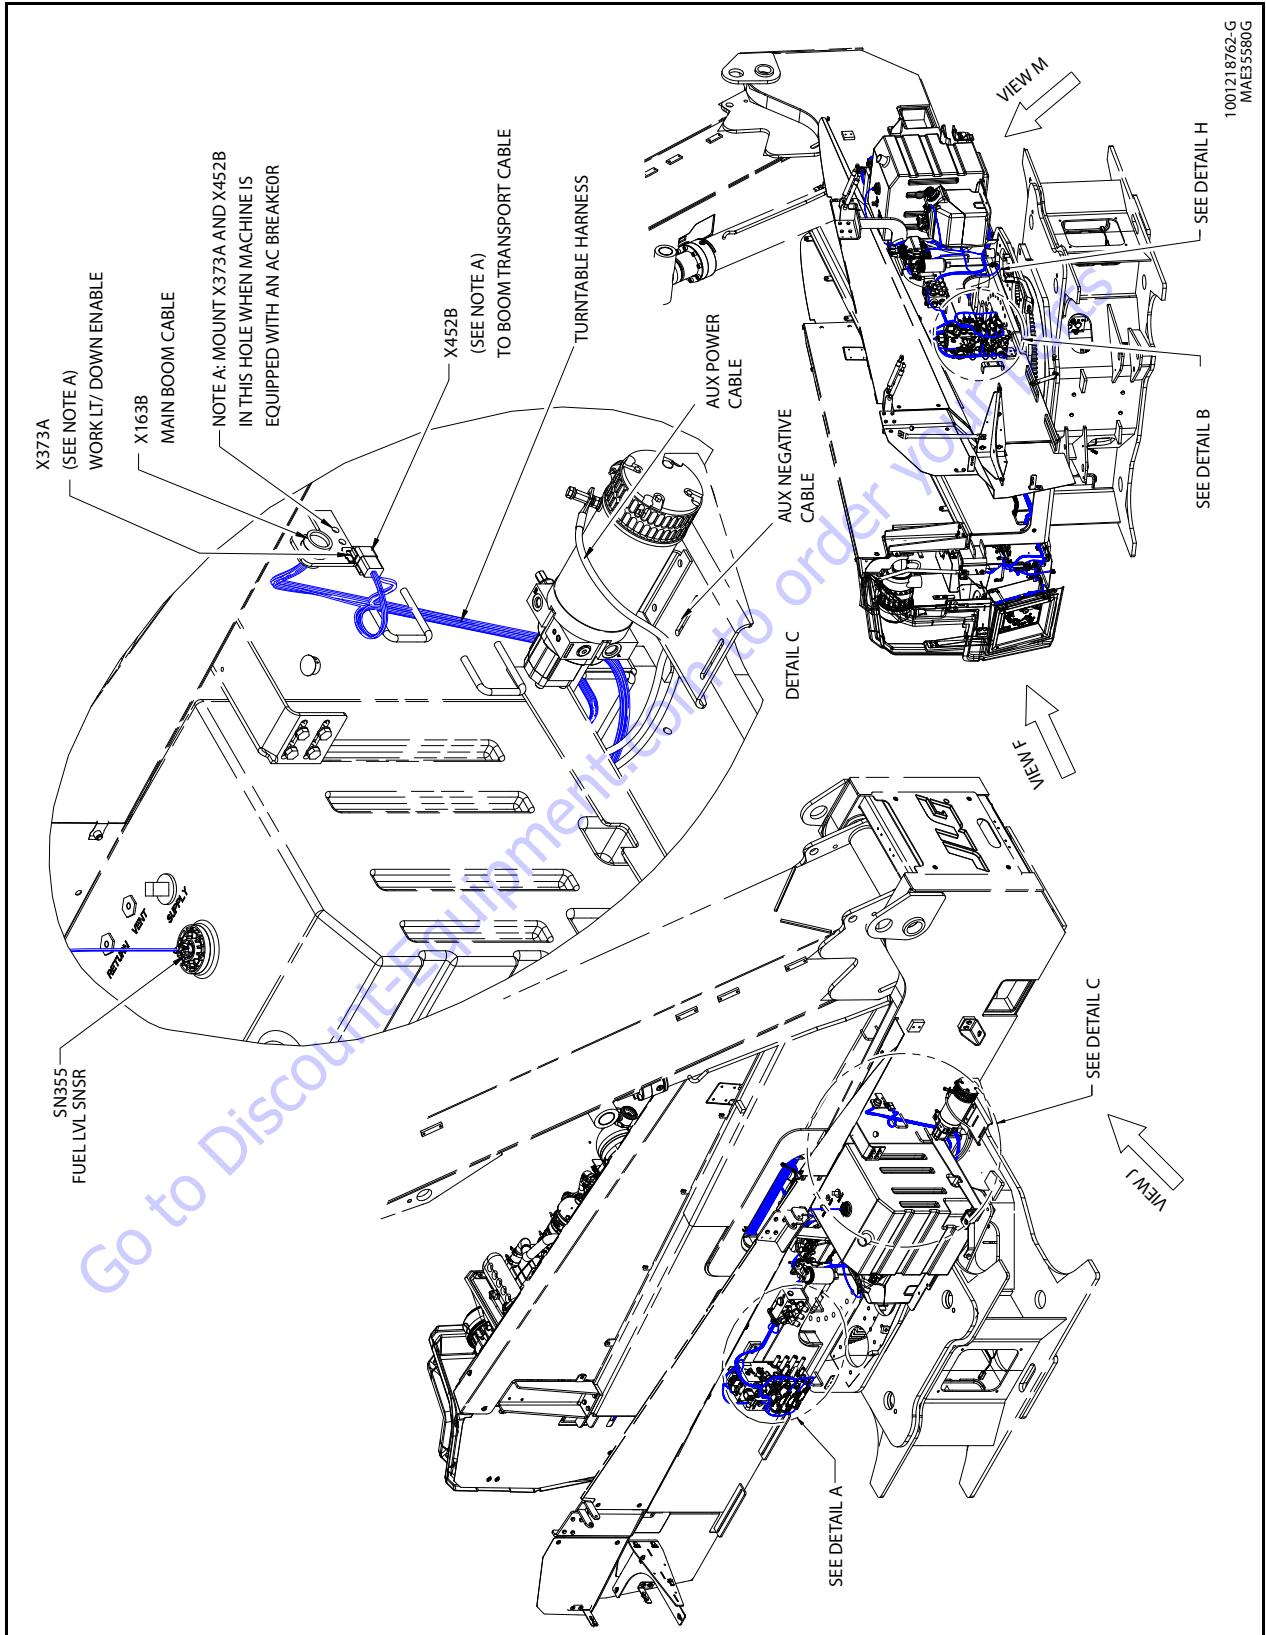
Chassis & Turntable Electrical Installation (HRC) - Sheet 1 of 11
